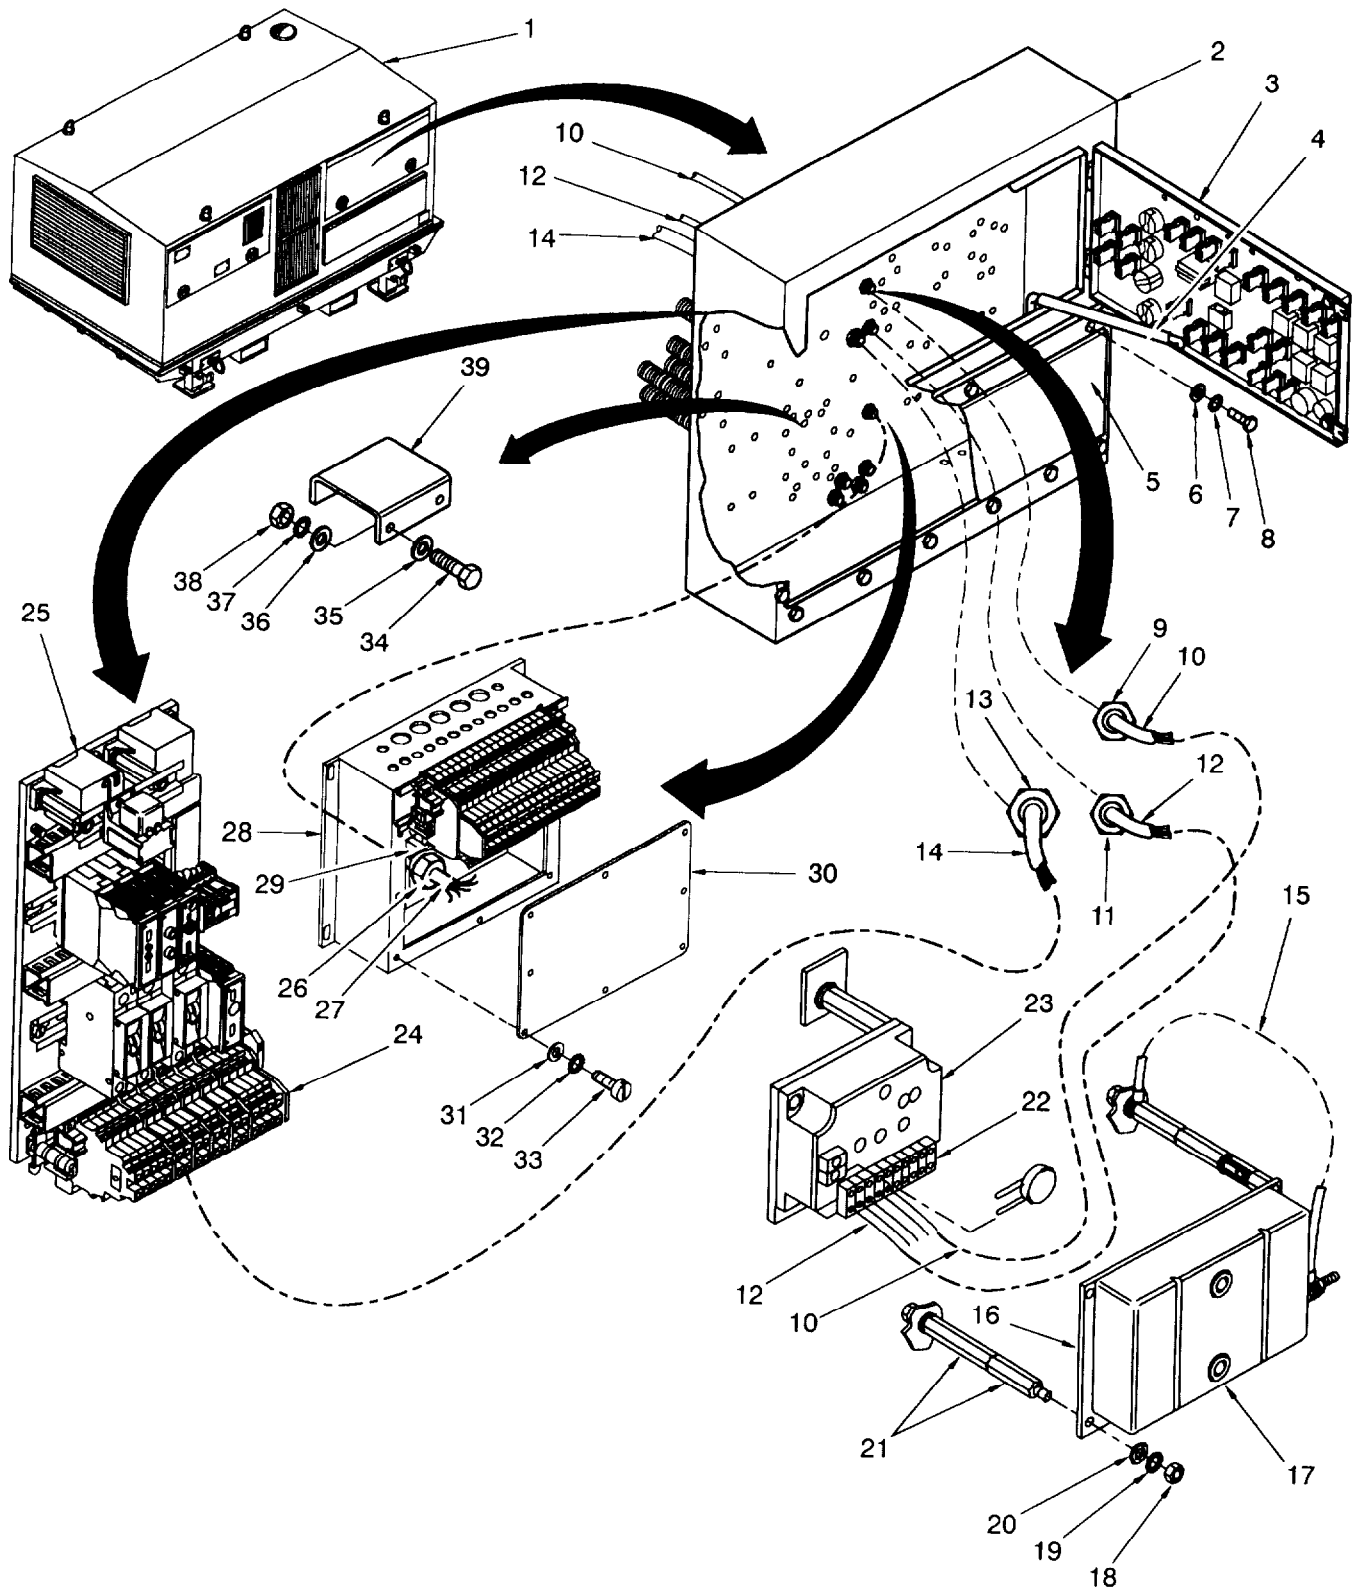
Control Cabinet Assembly Maintenance (Sheet 1 of 2).
